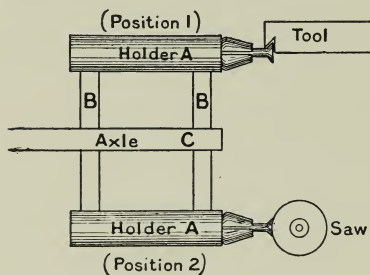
Machine for cleaning and slotting the Heads of Screws.
